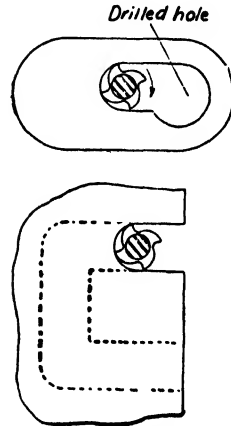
Application of Arbor Type Helical Milling Cutter.
